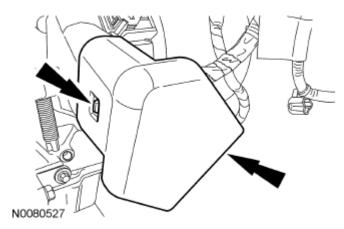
Locating Locking Tabs And Generator Air Duct Courtesy of FORD MOTOR CO.
